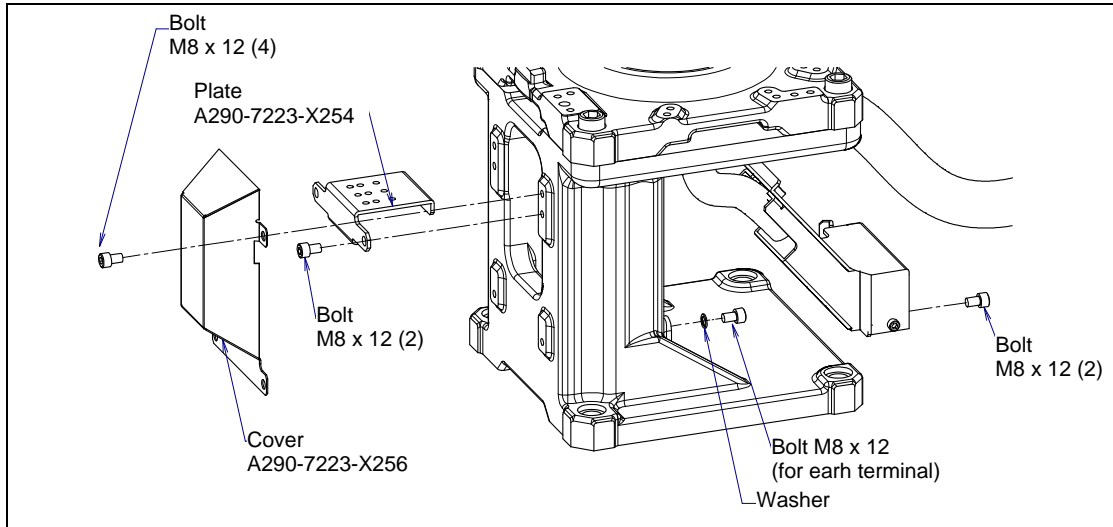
(i) Replacing the cable kit (pedestal for with pedestal)
